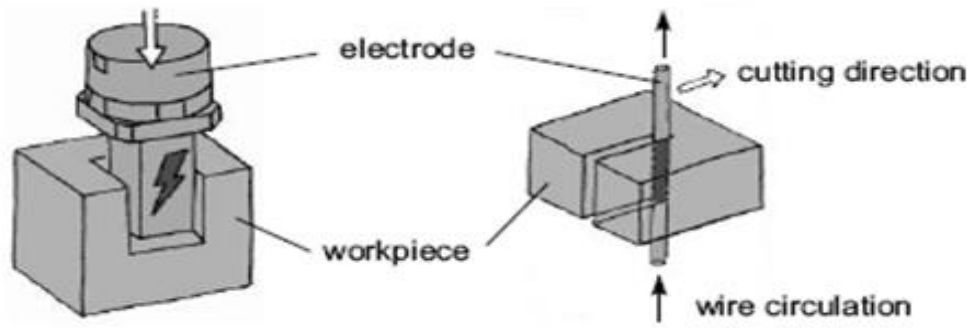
Die sinking & Wire cut EDM process[3]
